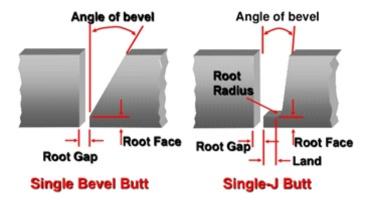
inspection and testing for groove welds (butt joints)
